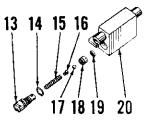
Exploded view of Series 5-414, 354, 364, and 384 power steering relief value assembly used with dual stage pump.
